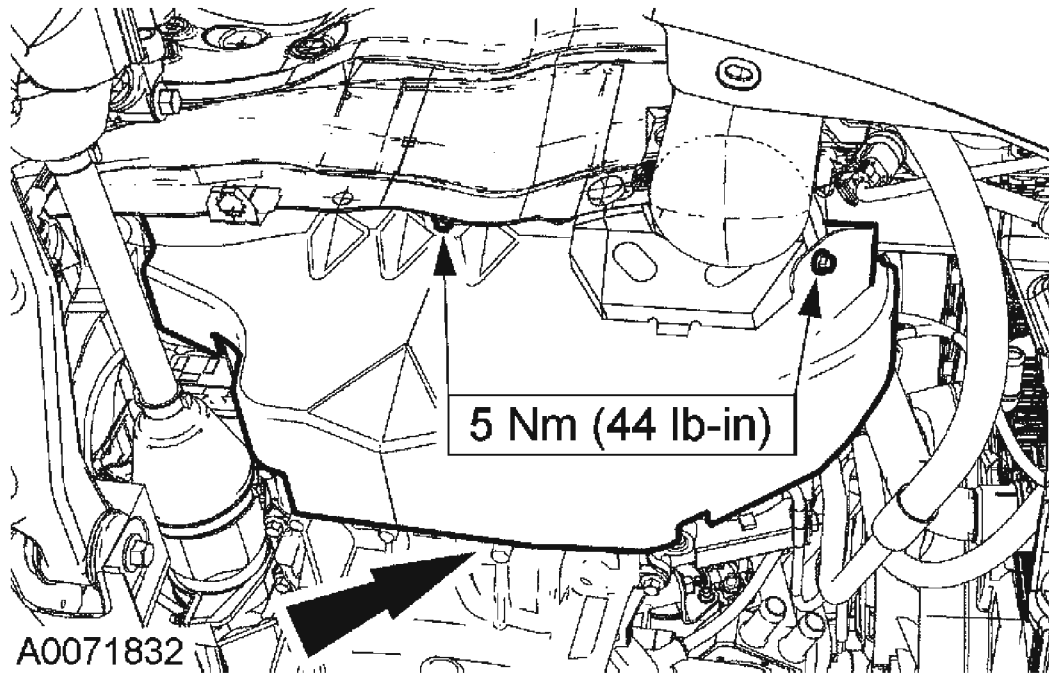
Removing Screws And Accessory Drive Splash Shield
